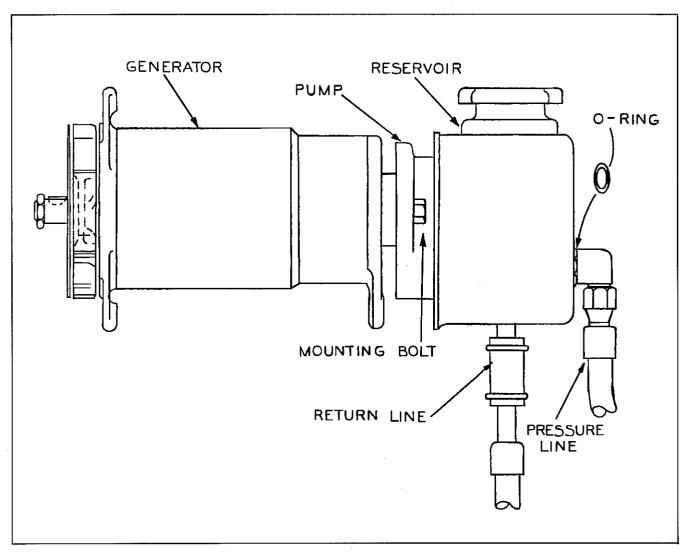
Typical Power Steering Pump (Machines so Equipped)
